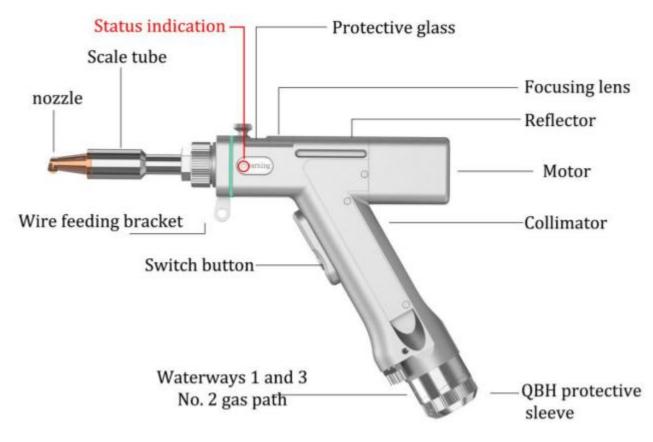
Schematic diagram of the SUP-23T welding head
